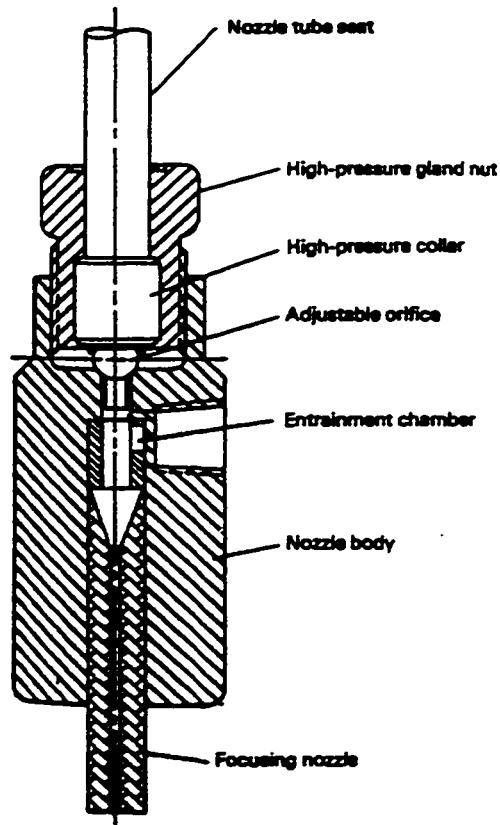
Cross Section View of a Nozzle Assembly<sup>23</sup>
